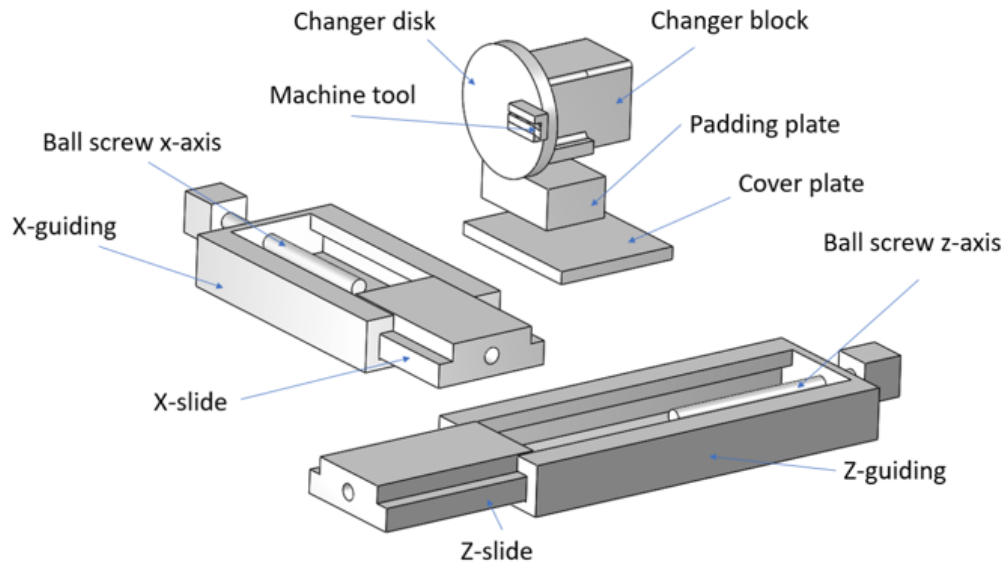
A general layout of the two slides including a turning tool, toolholder and ball screws.[12]
